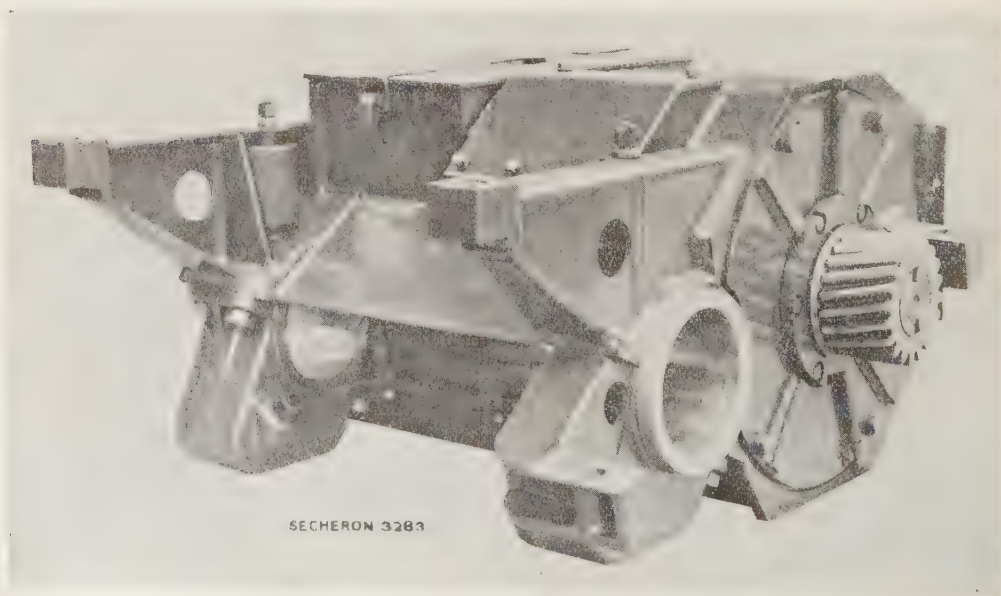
240-H.P. single-phase motor with all-welded frame.
